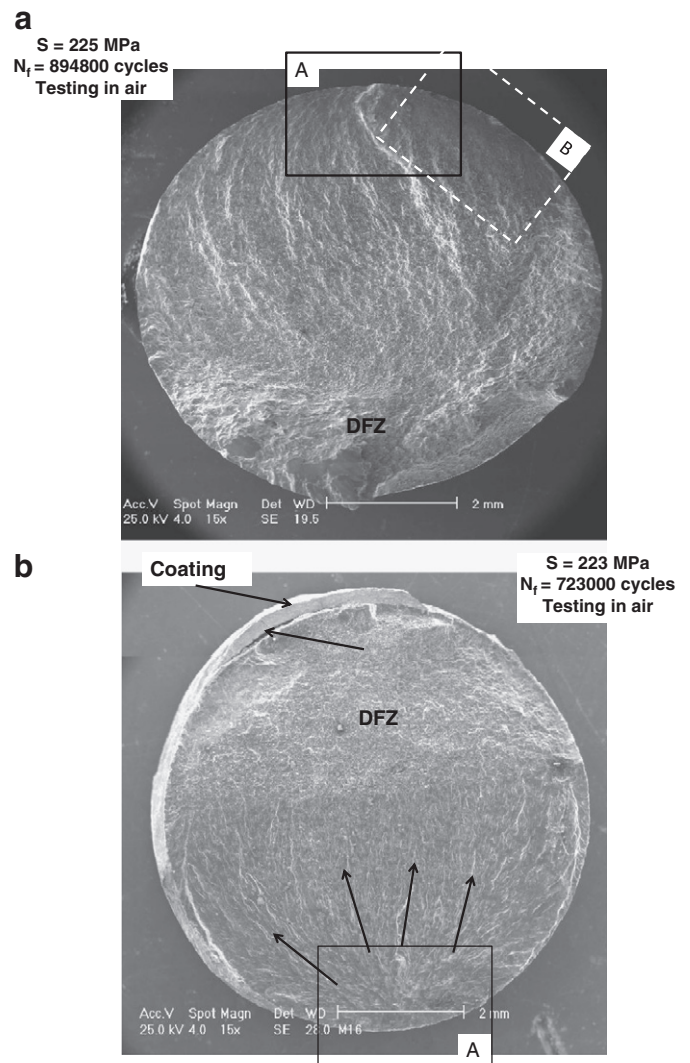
(a) Fracture surface of an uncoated sample tested at 225 MPa, which failed after 894,800 cycles. (b) Fracture surface of a coated sample tested at 223 MPa, which failed after 723,000 cycles. The fatigue fracture of the coated specimen occurred due to the propagation of a dominant crack. Arrows on the micrograph indicate the direction of the crack propagation.
